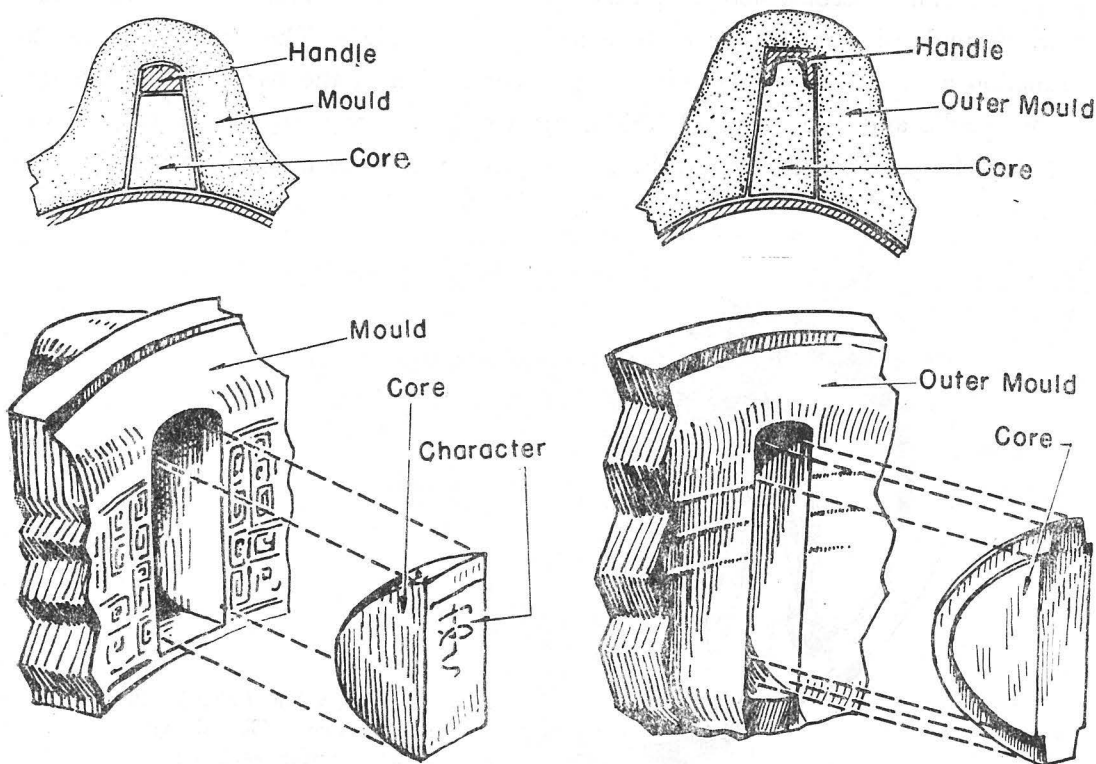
Mould assembly for the handle of *chiieh* R1062 (Hsi-pei-kang tomb 1745) with an integral outer mould and solid core.
